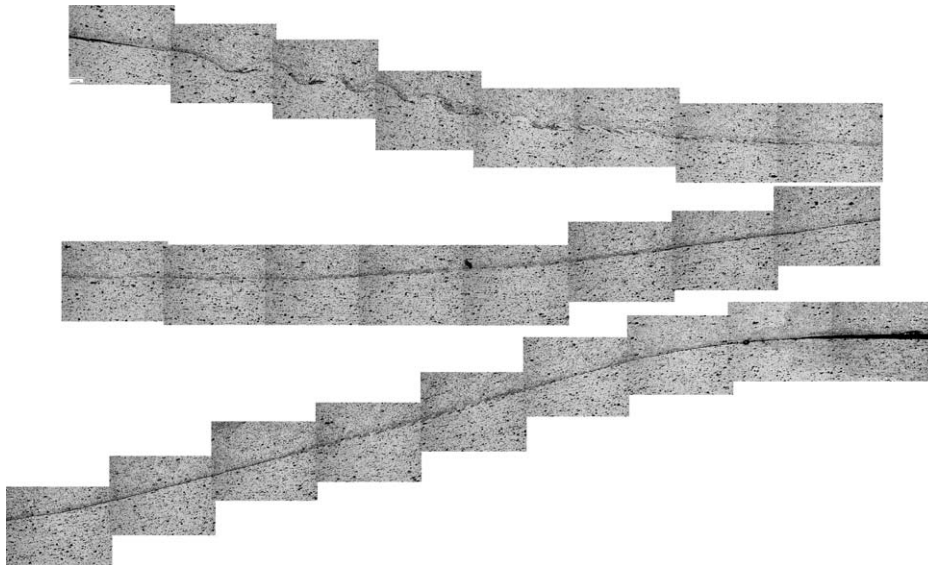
Montage showing entire welded interface for $\alpha = 4^\circ$ configuration. Top: beginning of the weld. Welding from the left to the right.
